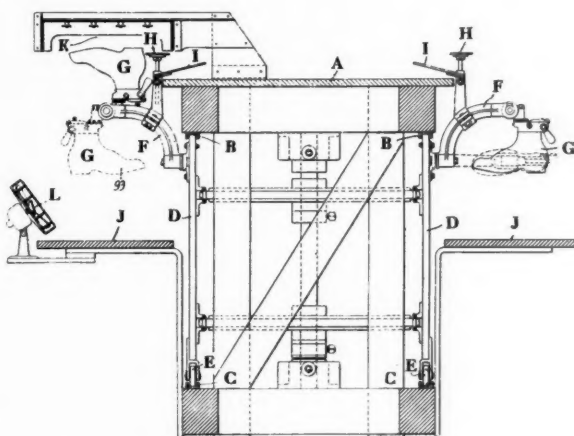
Vertical Section of Shoe Assembly Apparatus
